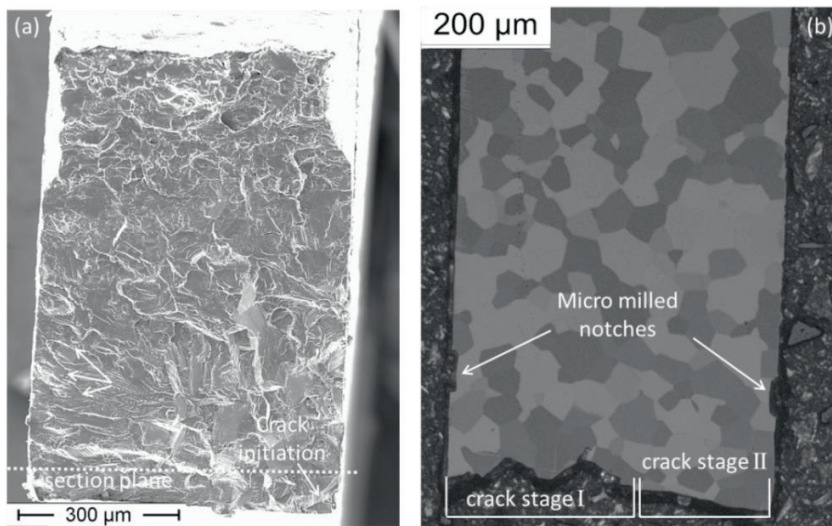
Fracture Surface (a) and microsection (b) of specimen C (micro milled 10 μm)
